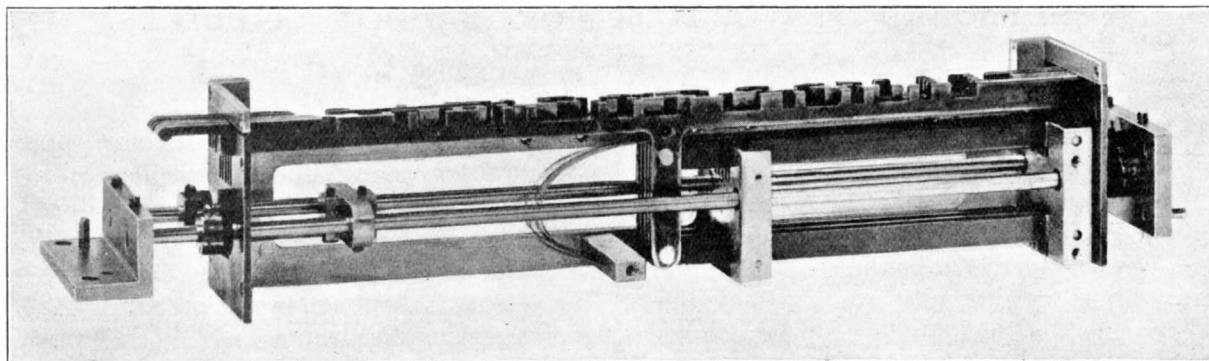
CODE BAR CARRIAGE. FRONT PLATE REMOVED.
